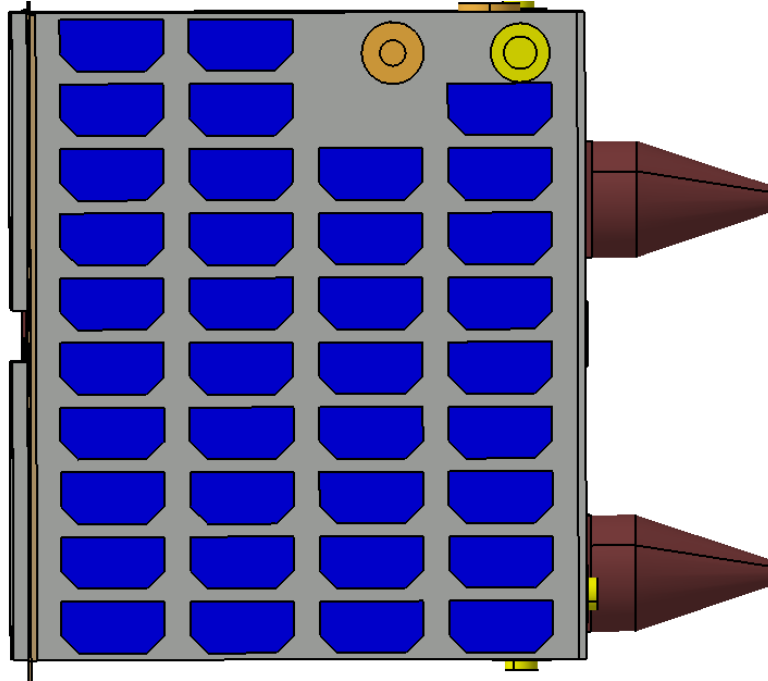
External view of the deployed platform, in front of the *thrusting module*.
